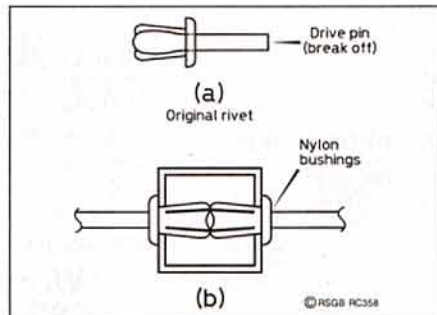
Nylon drive rivets make excellent mounting bushes for 4mm rod elements.
